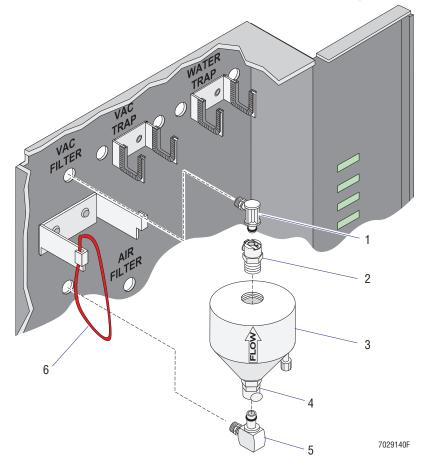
Vacuum and Air Filters with Related Components (See Table 8.2-53)
